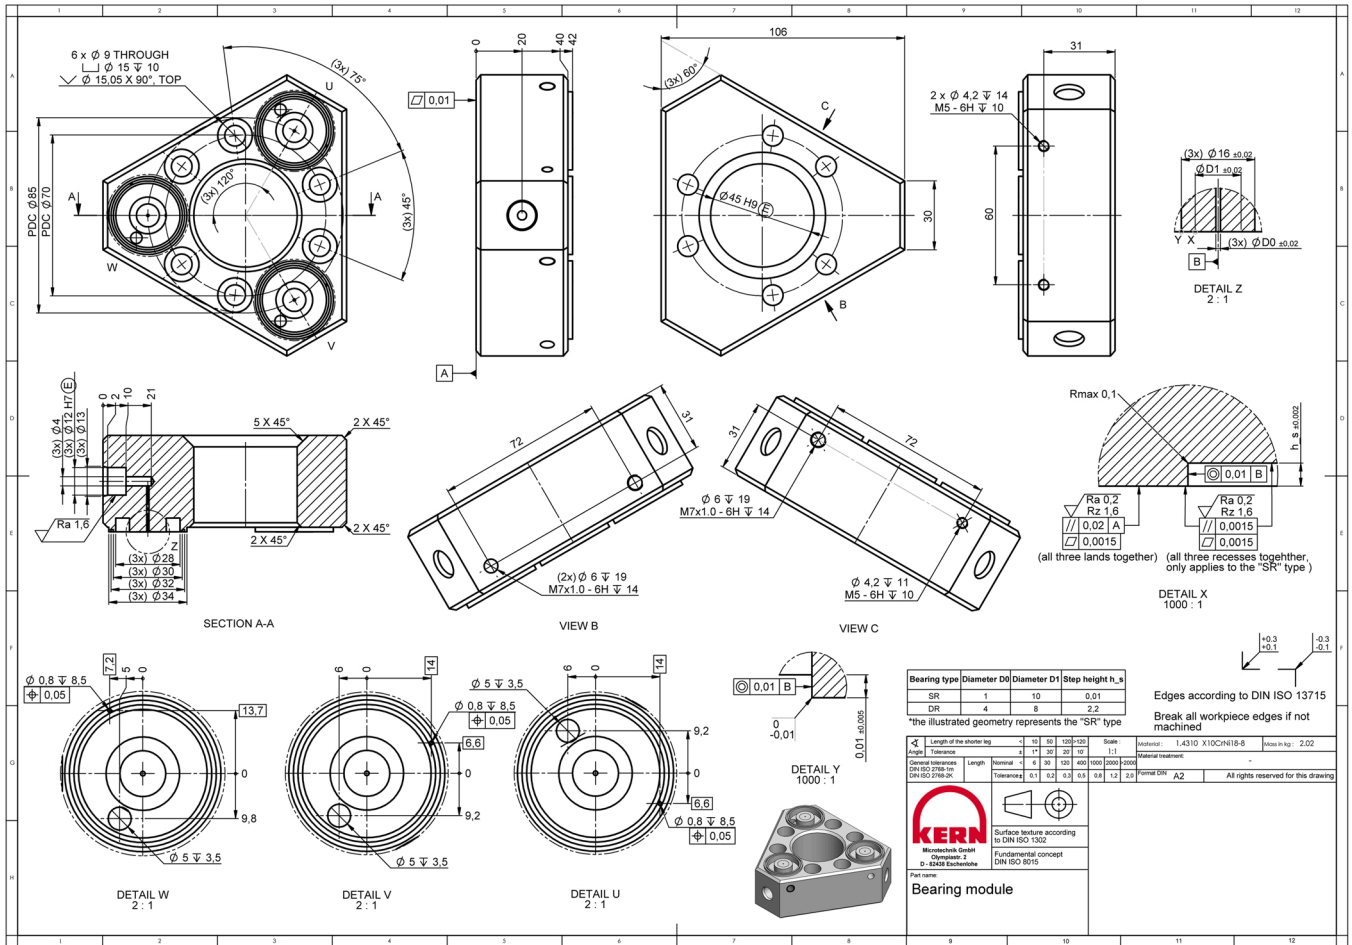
Engineering drawing of the pocket modules (Details X, Y and Z show the bearing geometry).
